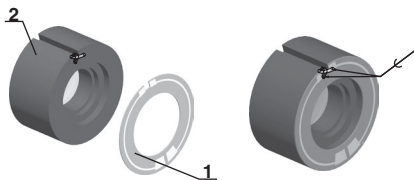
INSTALLATION OF THE BOARD TO THE TUBE
